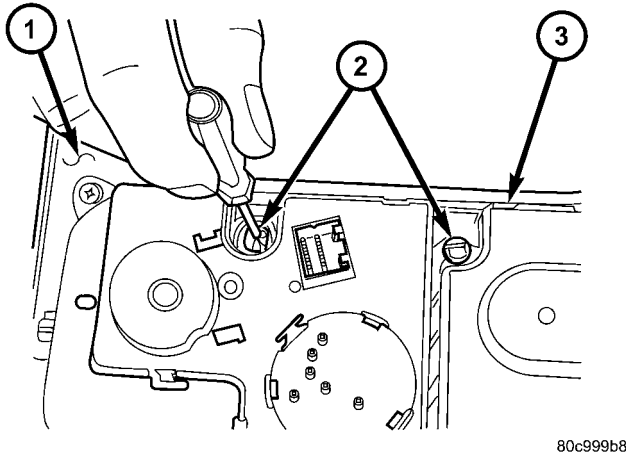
Heater-A/C Control Illumination Bulb Remove/Install
